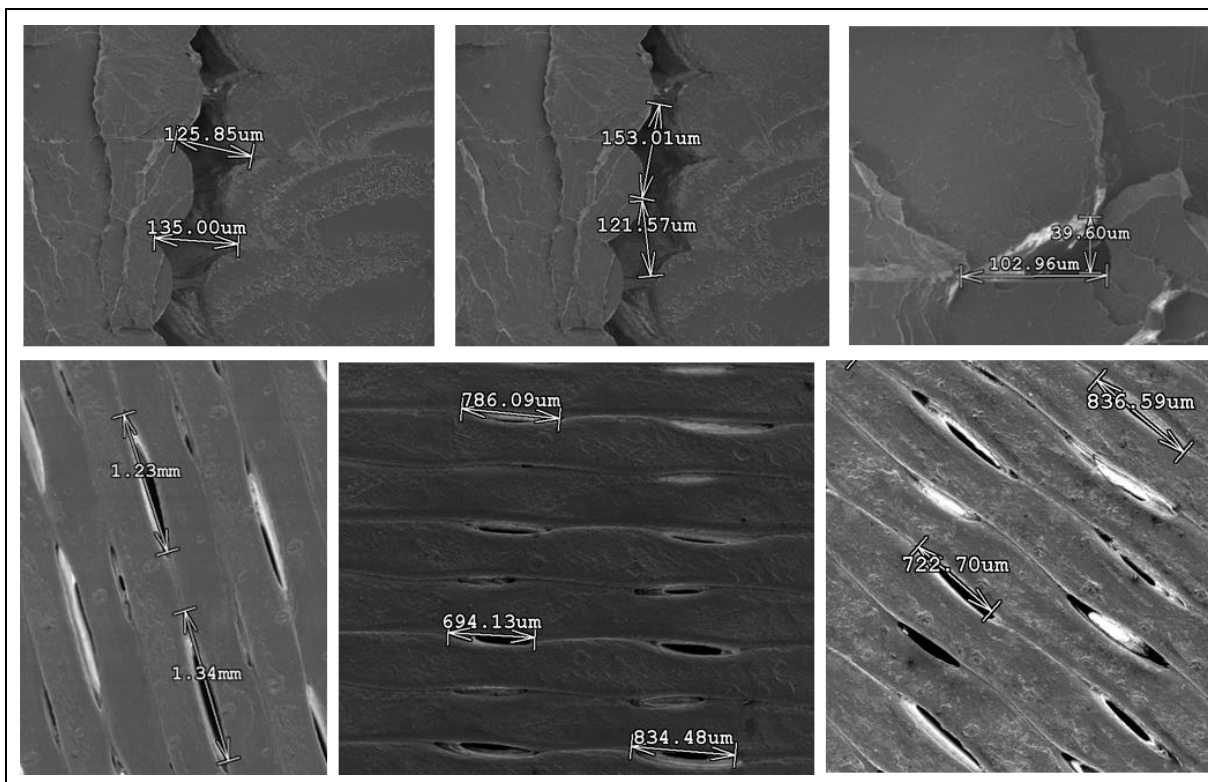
The defects observed during SEM imaging were documented on both the fractured and outer surfaces of the 3D-printed samples.
